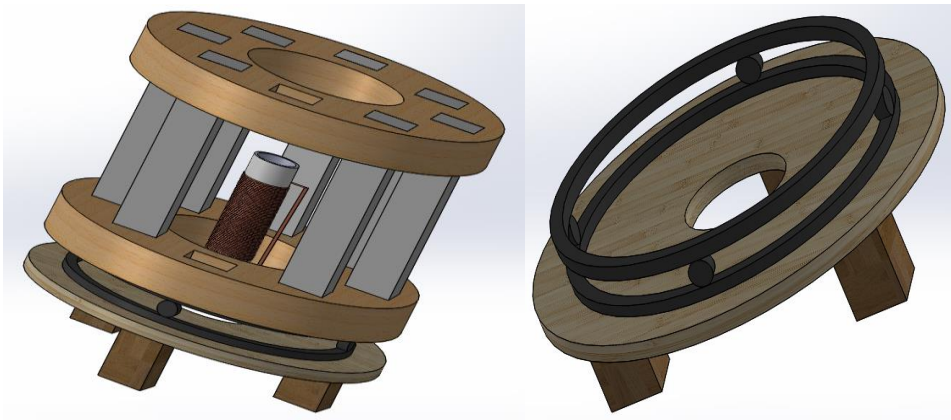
Overall housing assembly (left) and Swivel plate for rotation (right)
